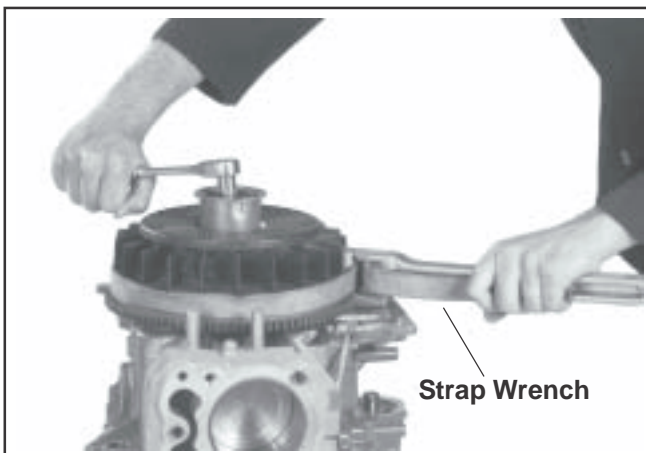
Removing Flywheel Retaining Screw and Drive Cup.
